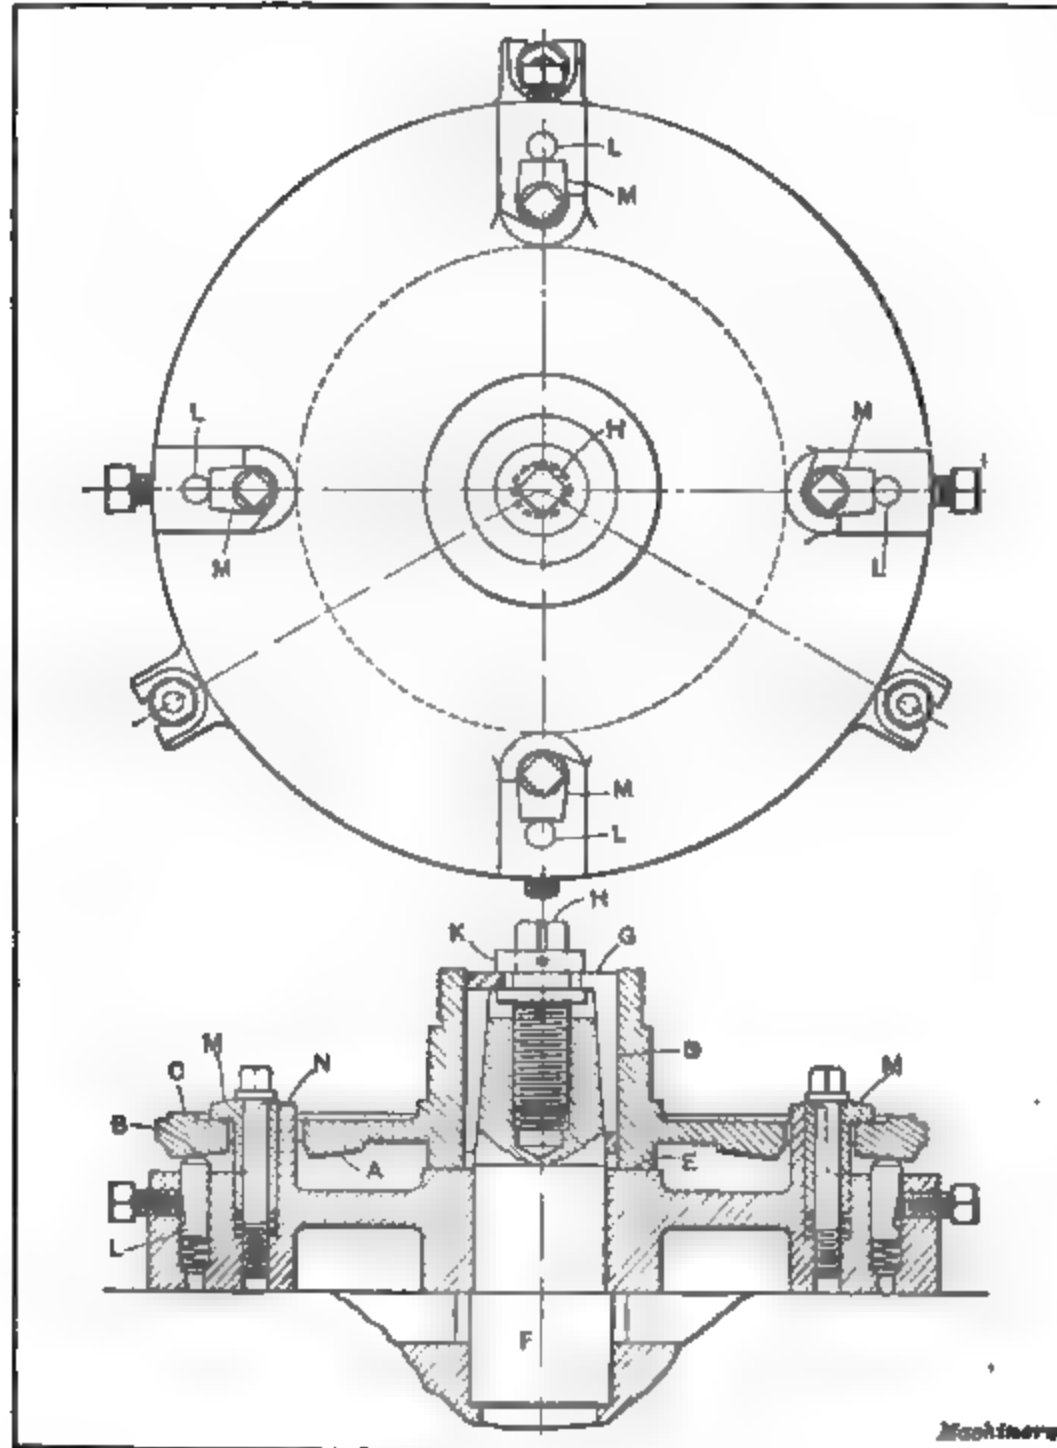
Vertical Boring Mill Fixture for Special Design of Bevel Gear
